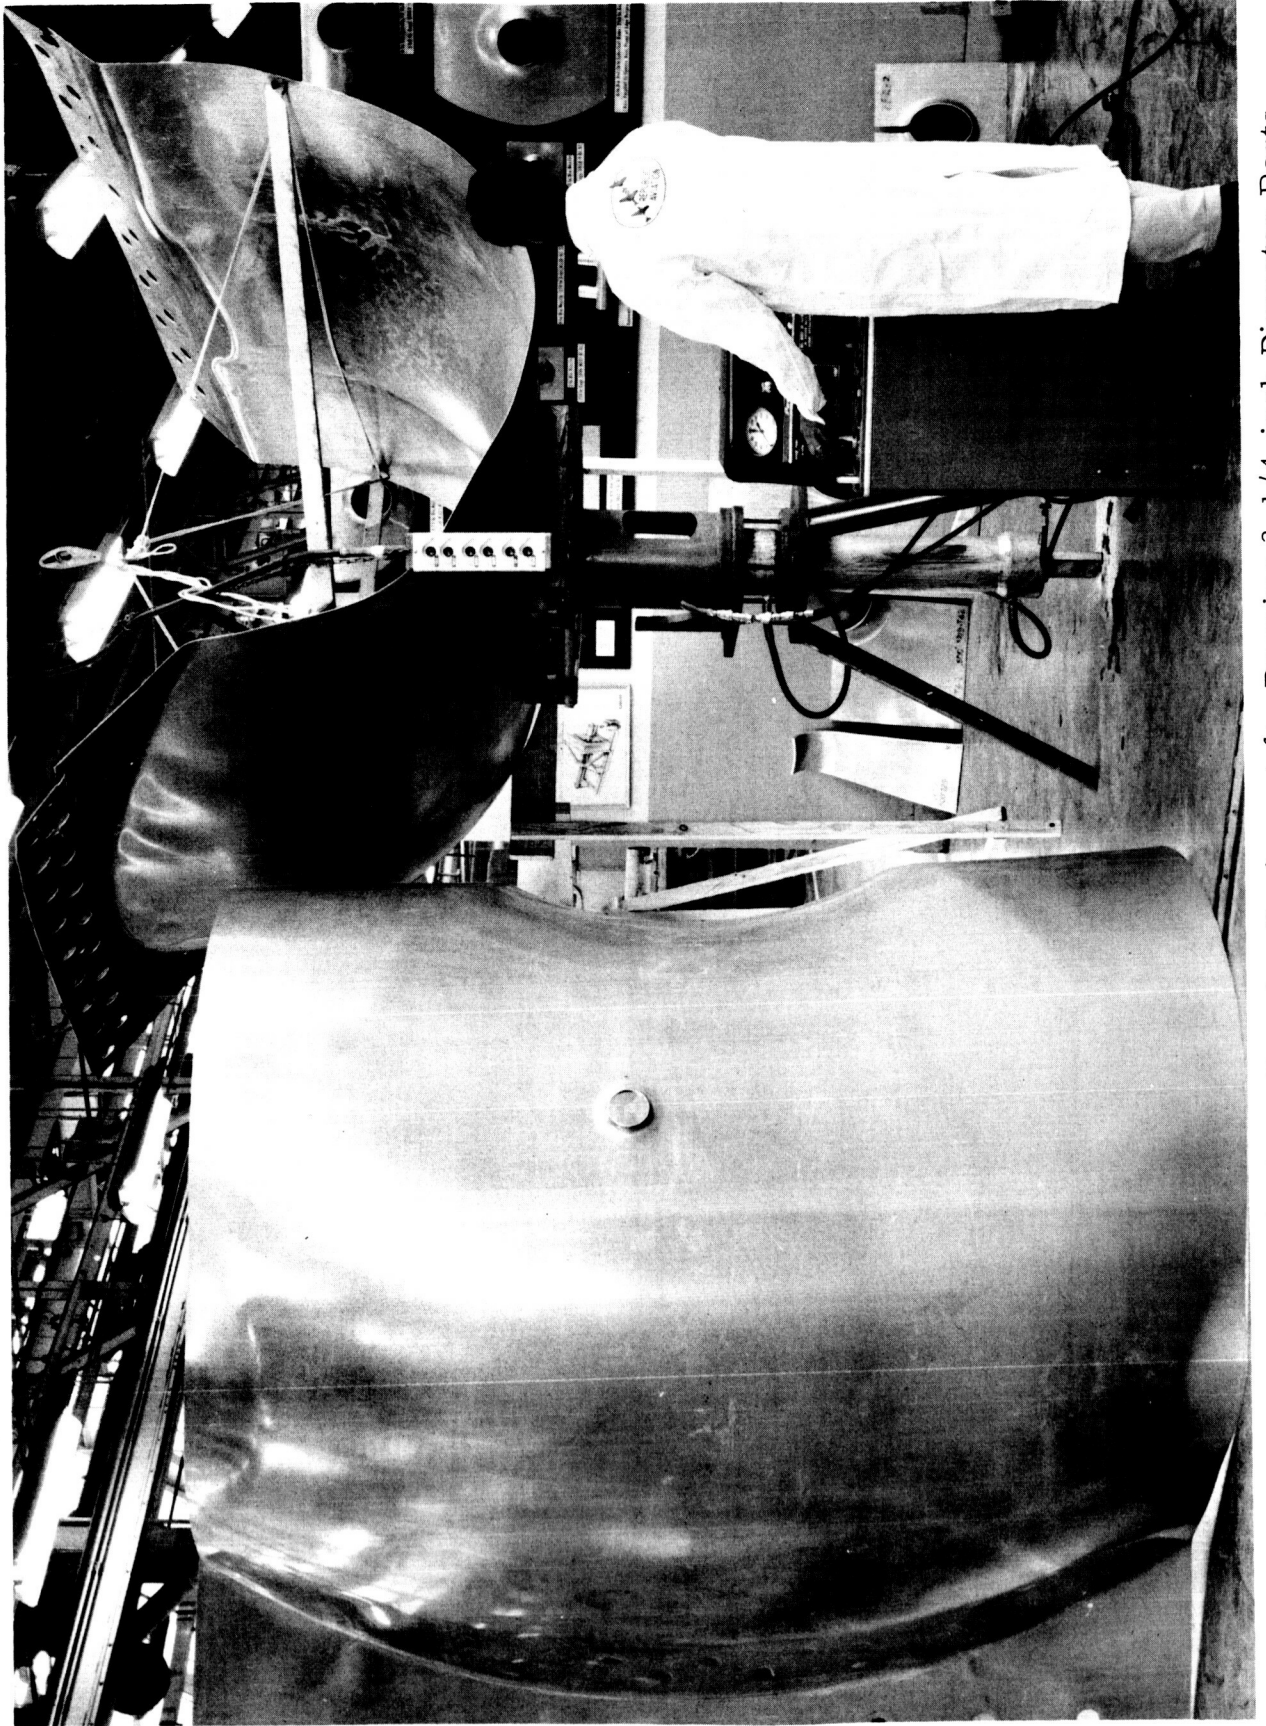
Hydraulic Draw Forming Equipment for Drawing 3-1/4-inch Diameter Ports
